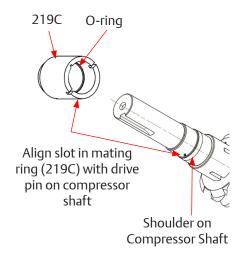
The Alignment of Compressor Shaft and Mating Ring
